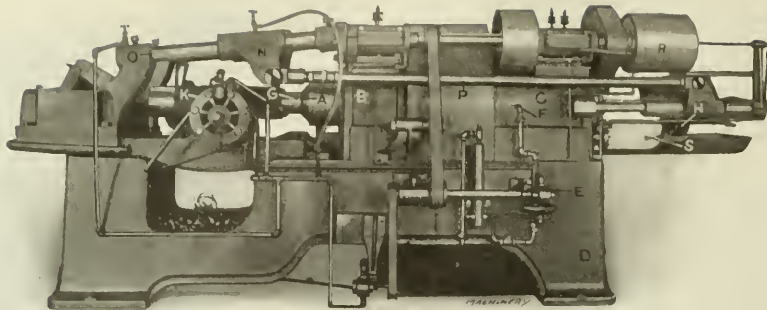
Warren Hydraulic Lathe for External Machining Operations on Shell Forgings
